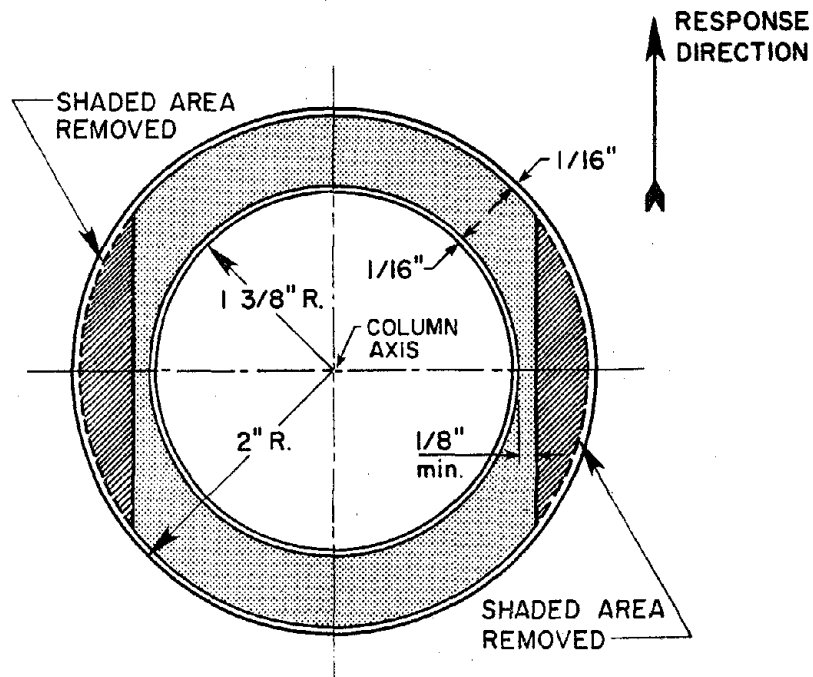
MODIFIED CROSS-SECTION OF THE I.F.T.
